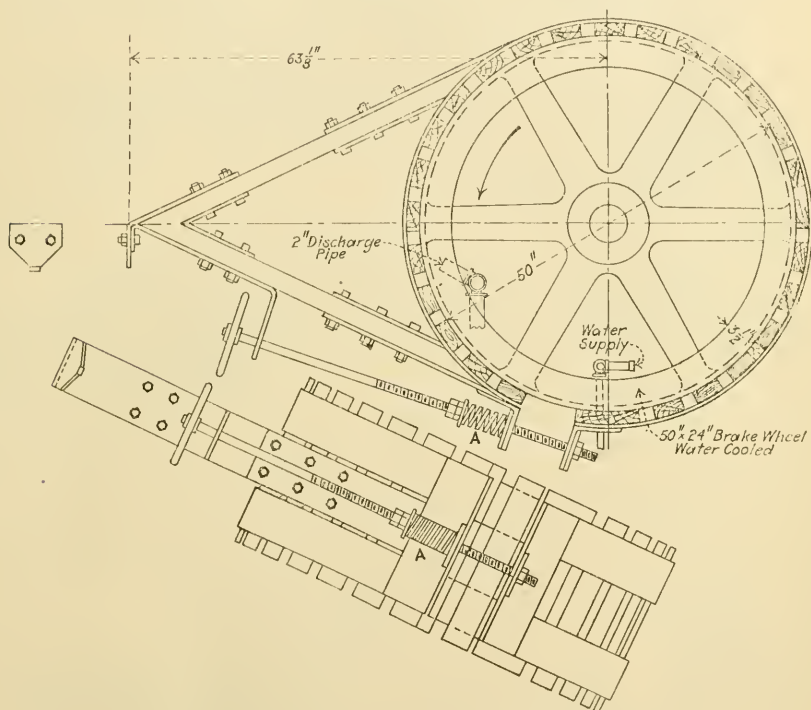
DETAILS OF PRONY BRAKE USED IN TESTS
